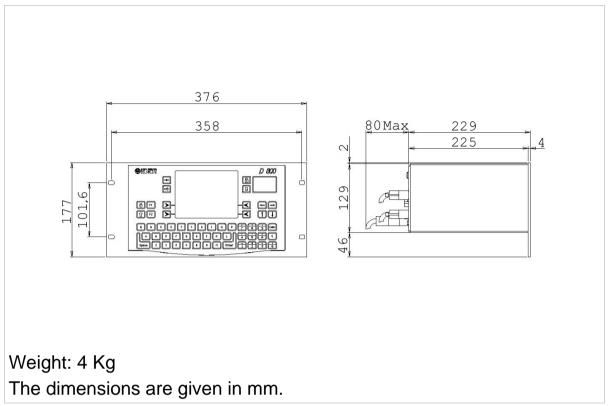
Dimensions and weight of rack-mounted version (citi0402.jpg)
